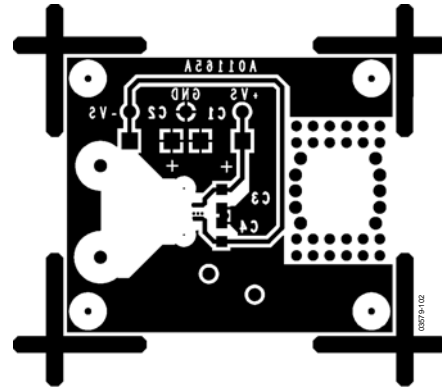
Example Layout. Bottom Layer of the AD8220 Evaluation Board
